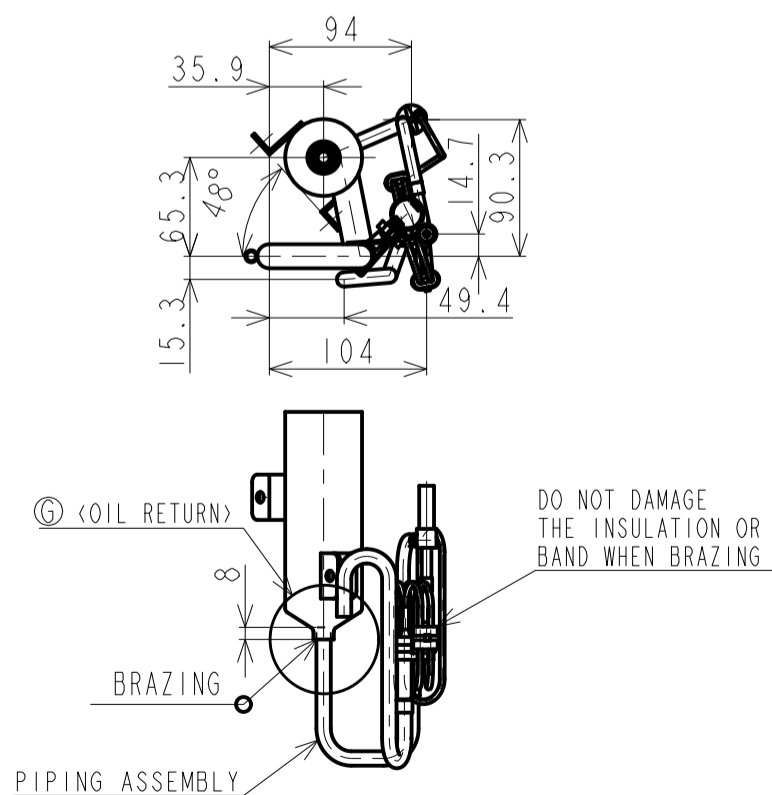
DETAILS OF OIL SEPARATOR ASSEMBLY AND PIPING ASSEMBLY BRAZING
